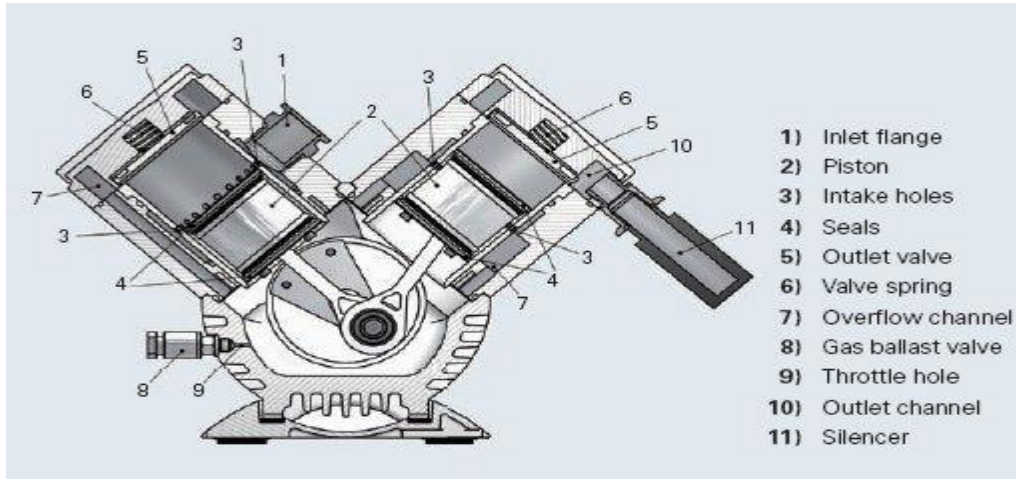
Compressed air pumps with its main parts [Courtesy of (<http://rice.360.wildapricot.org>.)]
